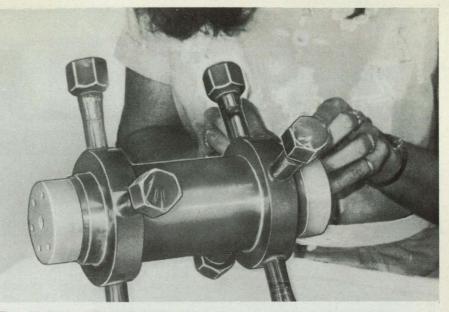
Prefabricated Manifold Inserts are installed on a tube assembly in preparation for electroforming.
